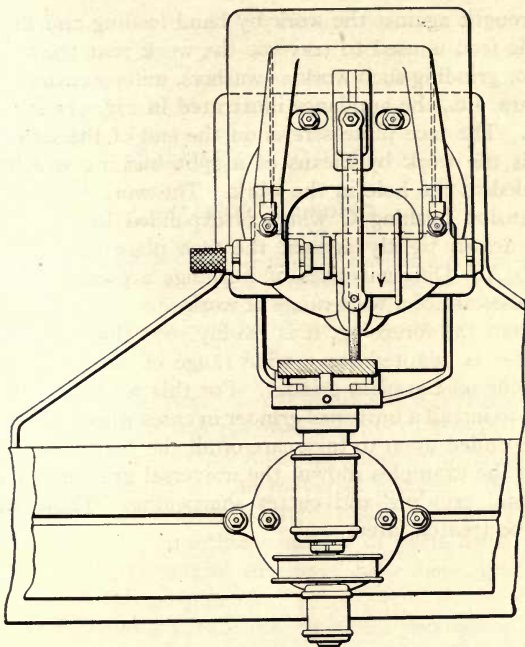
Grinding the side of a disc which is held in a four-jaw chuck on a Brown & Sharpe universal grinding machine.
